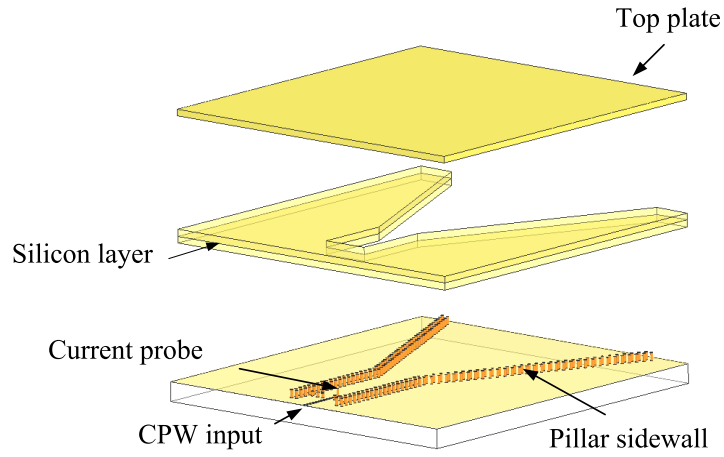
The assembly scheme for the horn structure layer by layer.
